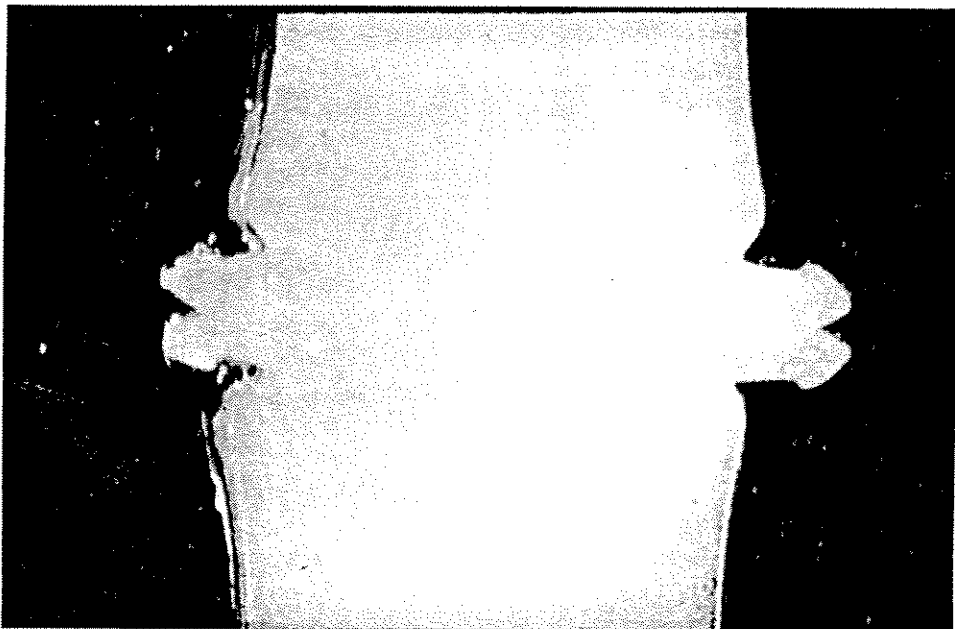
Macrograph of D7.1 Weld Profile, Mag. 6X
